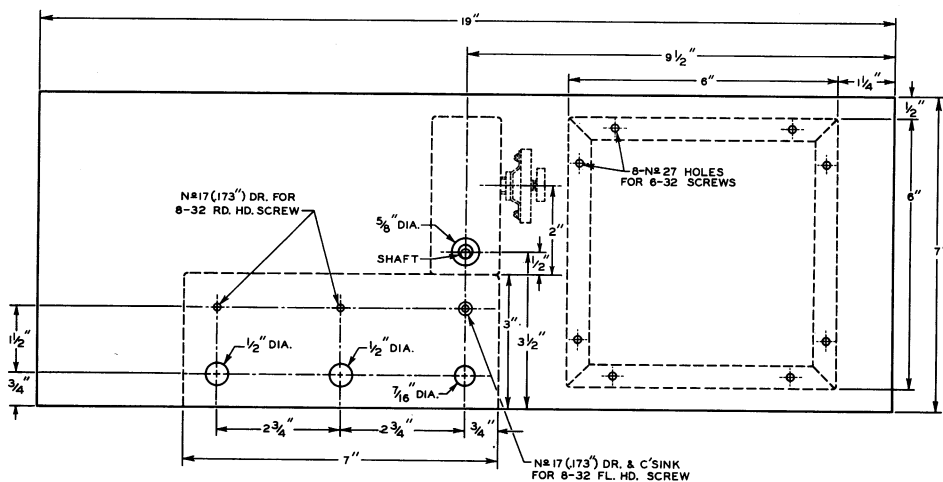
Panel-layout drawing showing the location of the power-supply chassis, VFO box, and the dial gear box.
